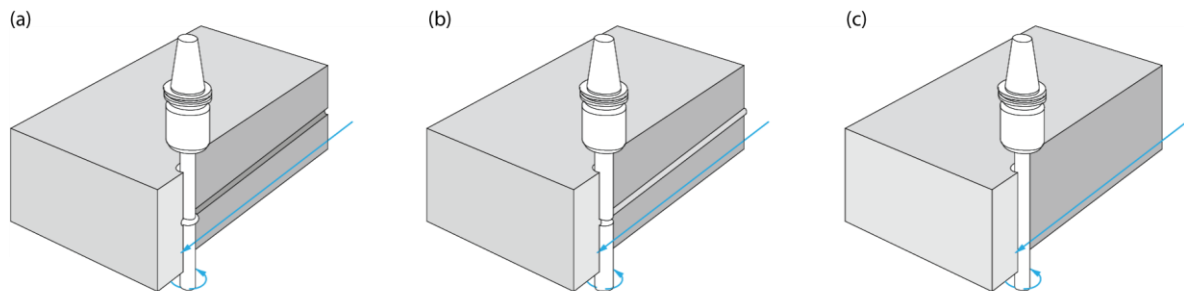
Custom-made profiling tools: (a) female registration-groove tool; (b) male registration-groove tool; and (c) plain cylindrical tool.
